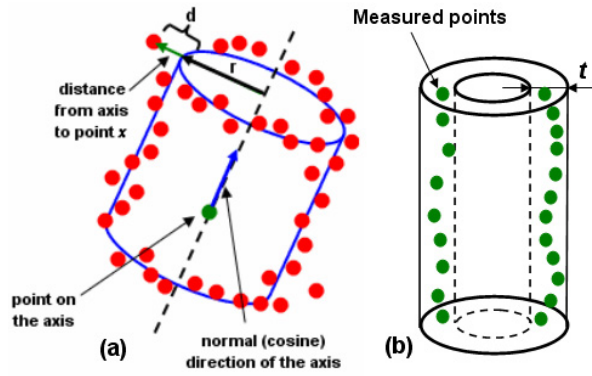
(a) Dimensional LSQ fitting (b) Geometric MZ fitting.
